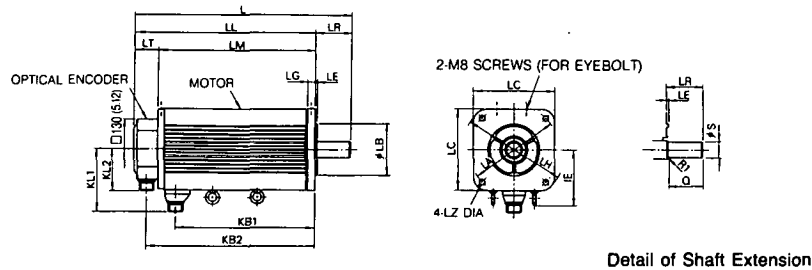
USAMED-03□□1, -06□□1 (Taper Shaft), -09B□□2 (Straight Shaft)
